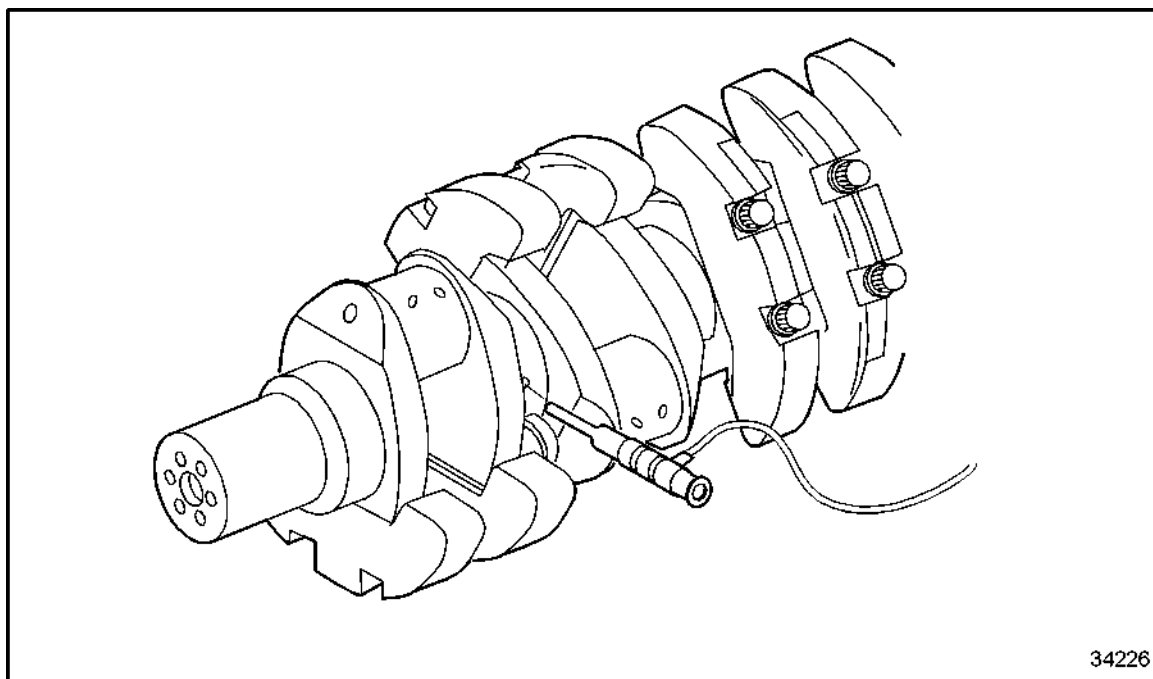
Inspecting Oil Bores with Borescope
